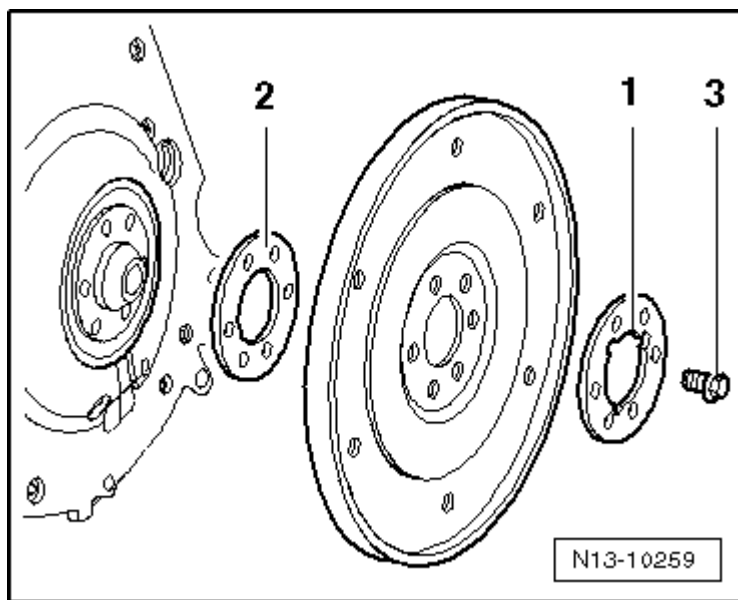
Installing Drive Plate Only By Using Washer With Recesses
